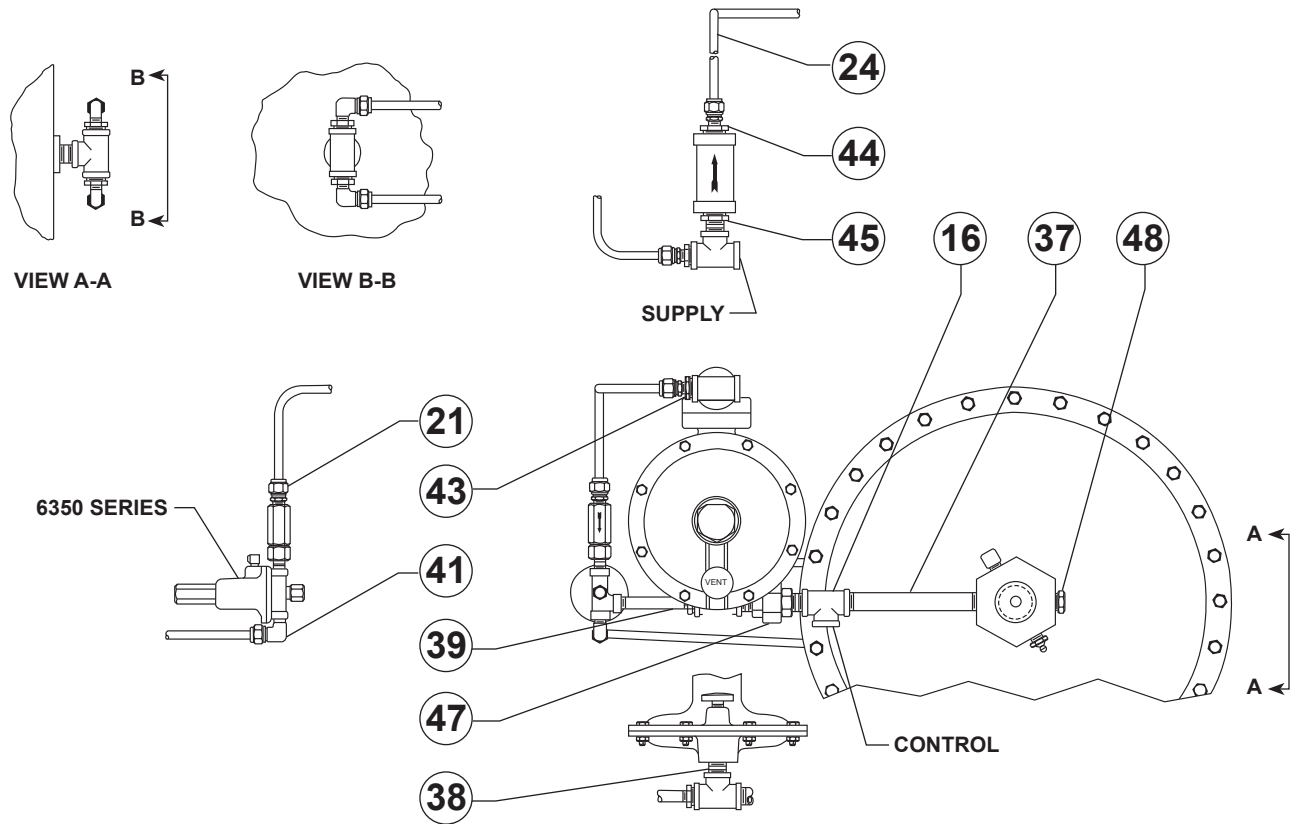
Type 1098-EGR with Type Y600AM Mounting Parts
